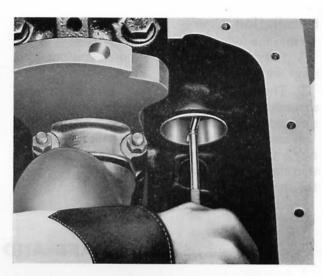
Checking a camshaft bearing bore for wear, using a telescopic gauge
